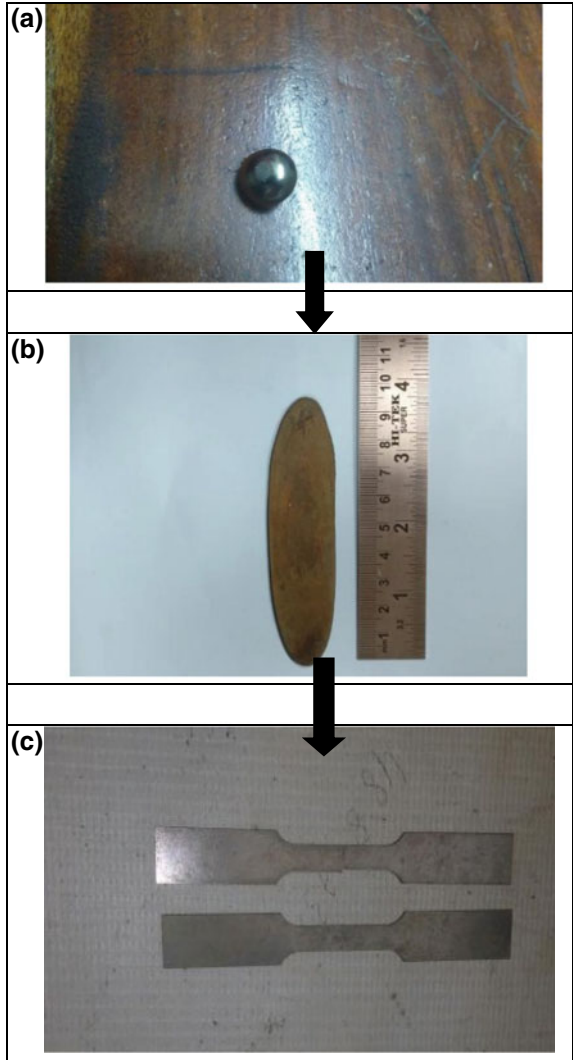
a Button shape TiNi specimen produced by vacuum arc melting, b cold rolled TiNi specimen
